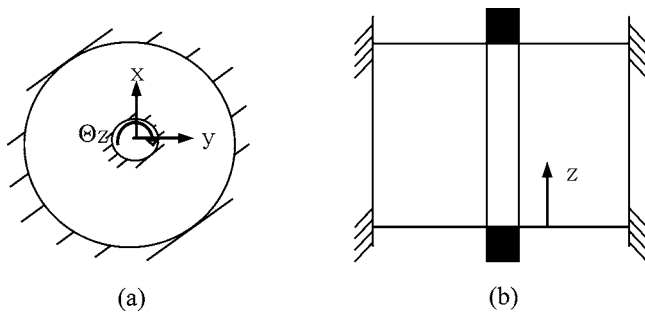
Flexure guide mechanism: (a) clamped circular plate and (b) the assembly of shaft and circular plate.
